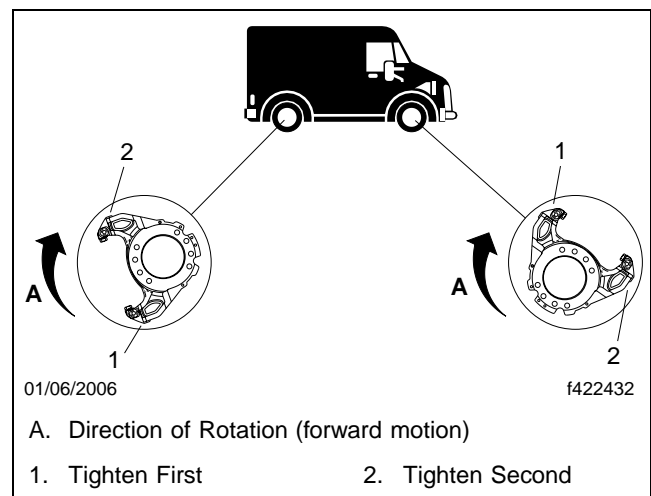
, Tightening Sequence for Caliper Mounting Bolts, Right Side
